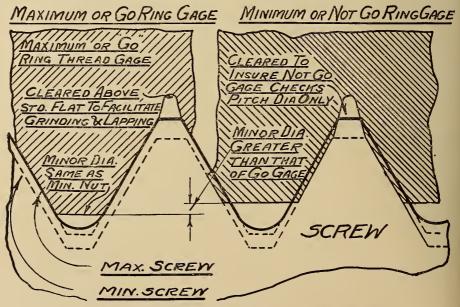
Illustration of "go" and "not go" plug and ring gages
